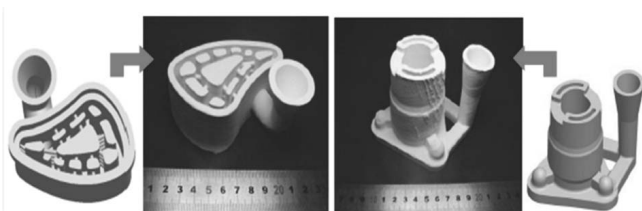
Ceramic casting moulds fabricated with the CSL process.
